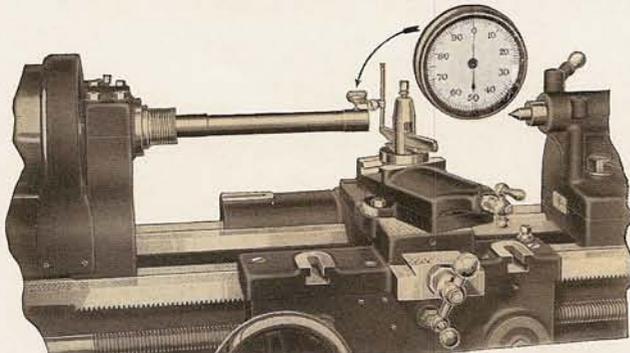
Testing Headstock Spindle. The Dial Indicator Registers in 1/10,000 of an Inch
